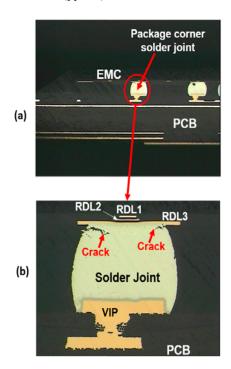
a) Failure location, and b) failure mode of the fan-out package with lead-free solder joints on a PCB subjected to thermal cycling.
